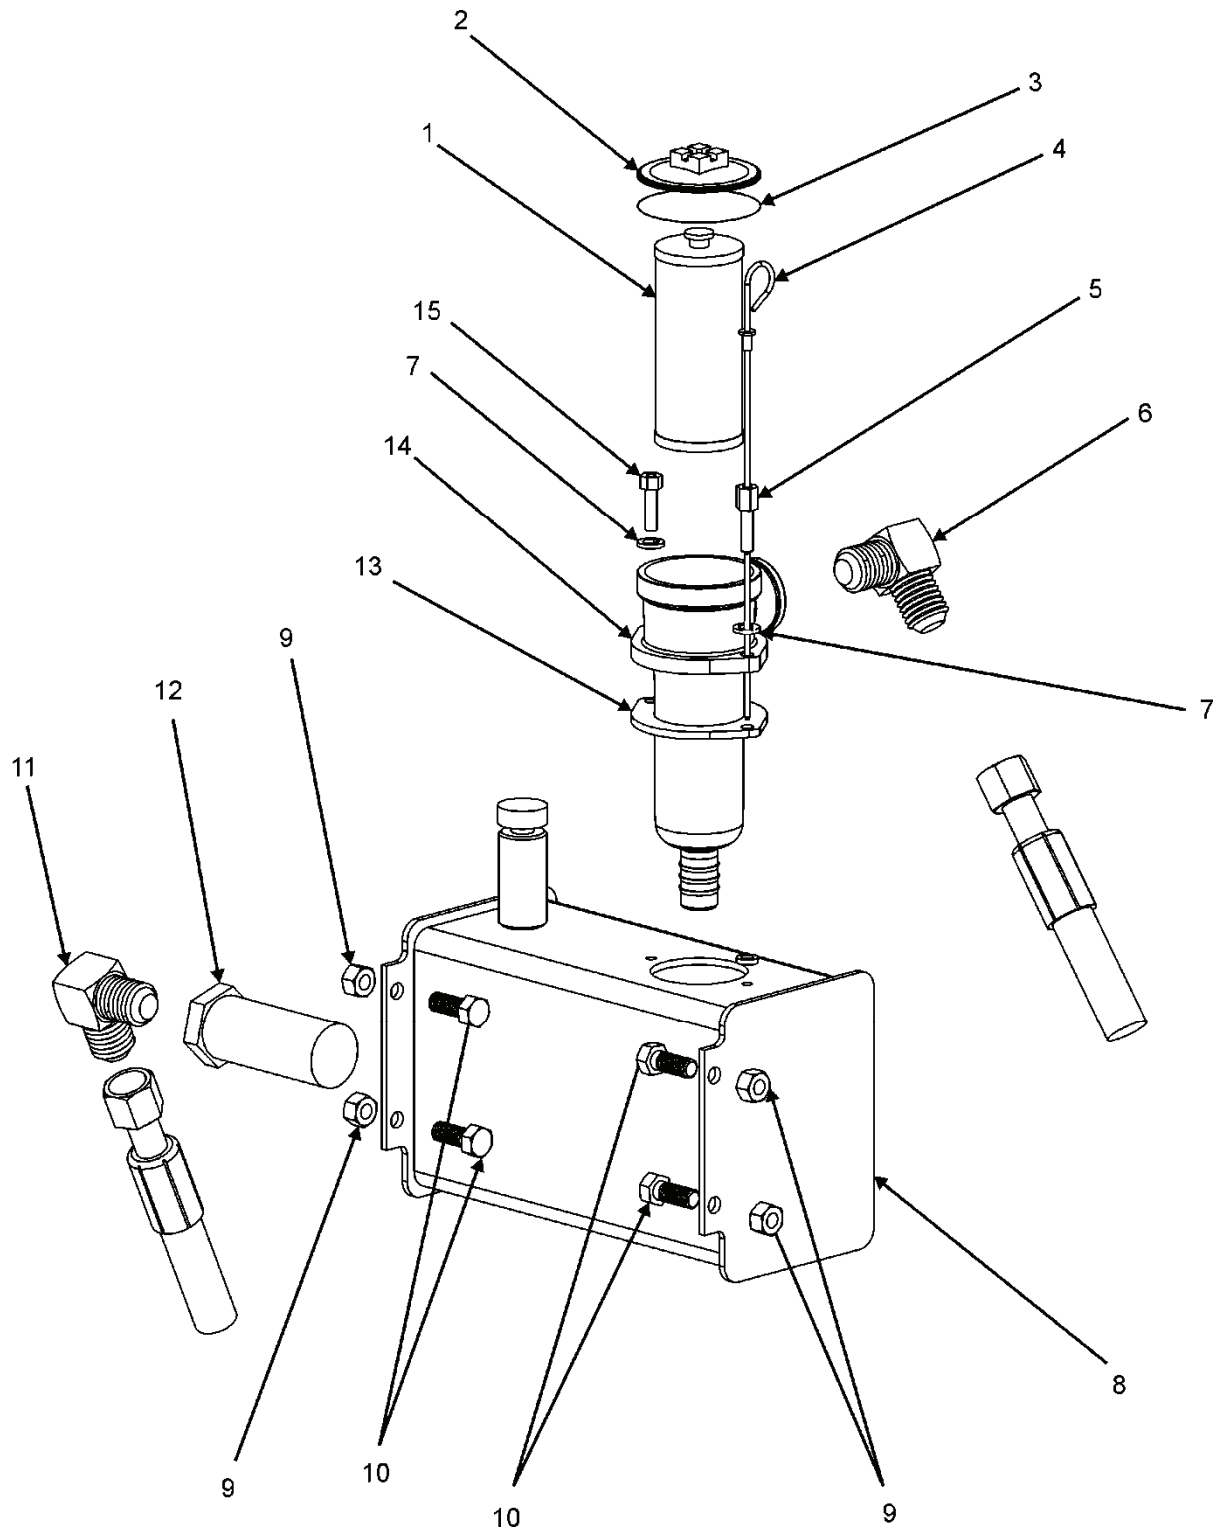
HYDRAULIC TANK ASSEMBLY
